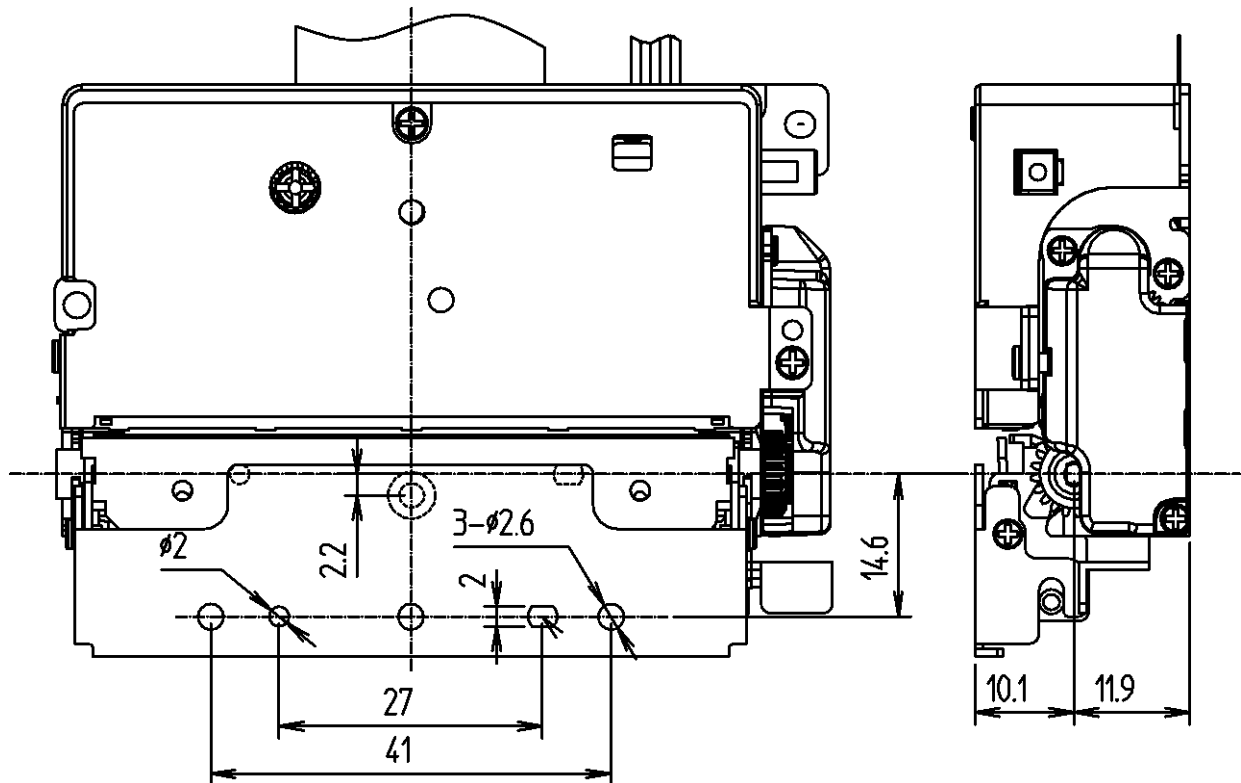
Dimensions of mechanism related to the mounting of the platen roller block
